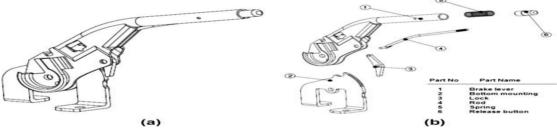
3D CAD model of a commercial passenger vehicle center lever parking brake design in (a) assembly view, and (b) exploded view[13].
